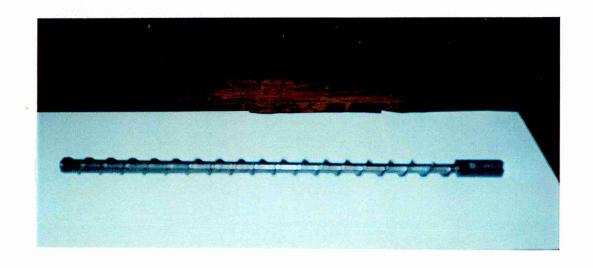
Photo of Screw for General Purpose Extruder Machine
